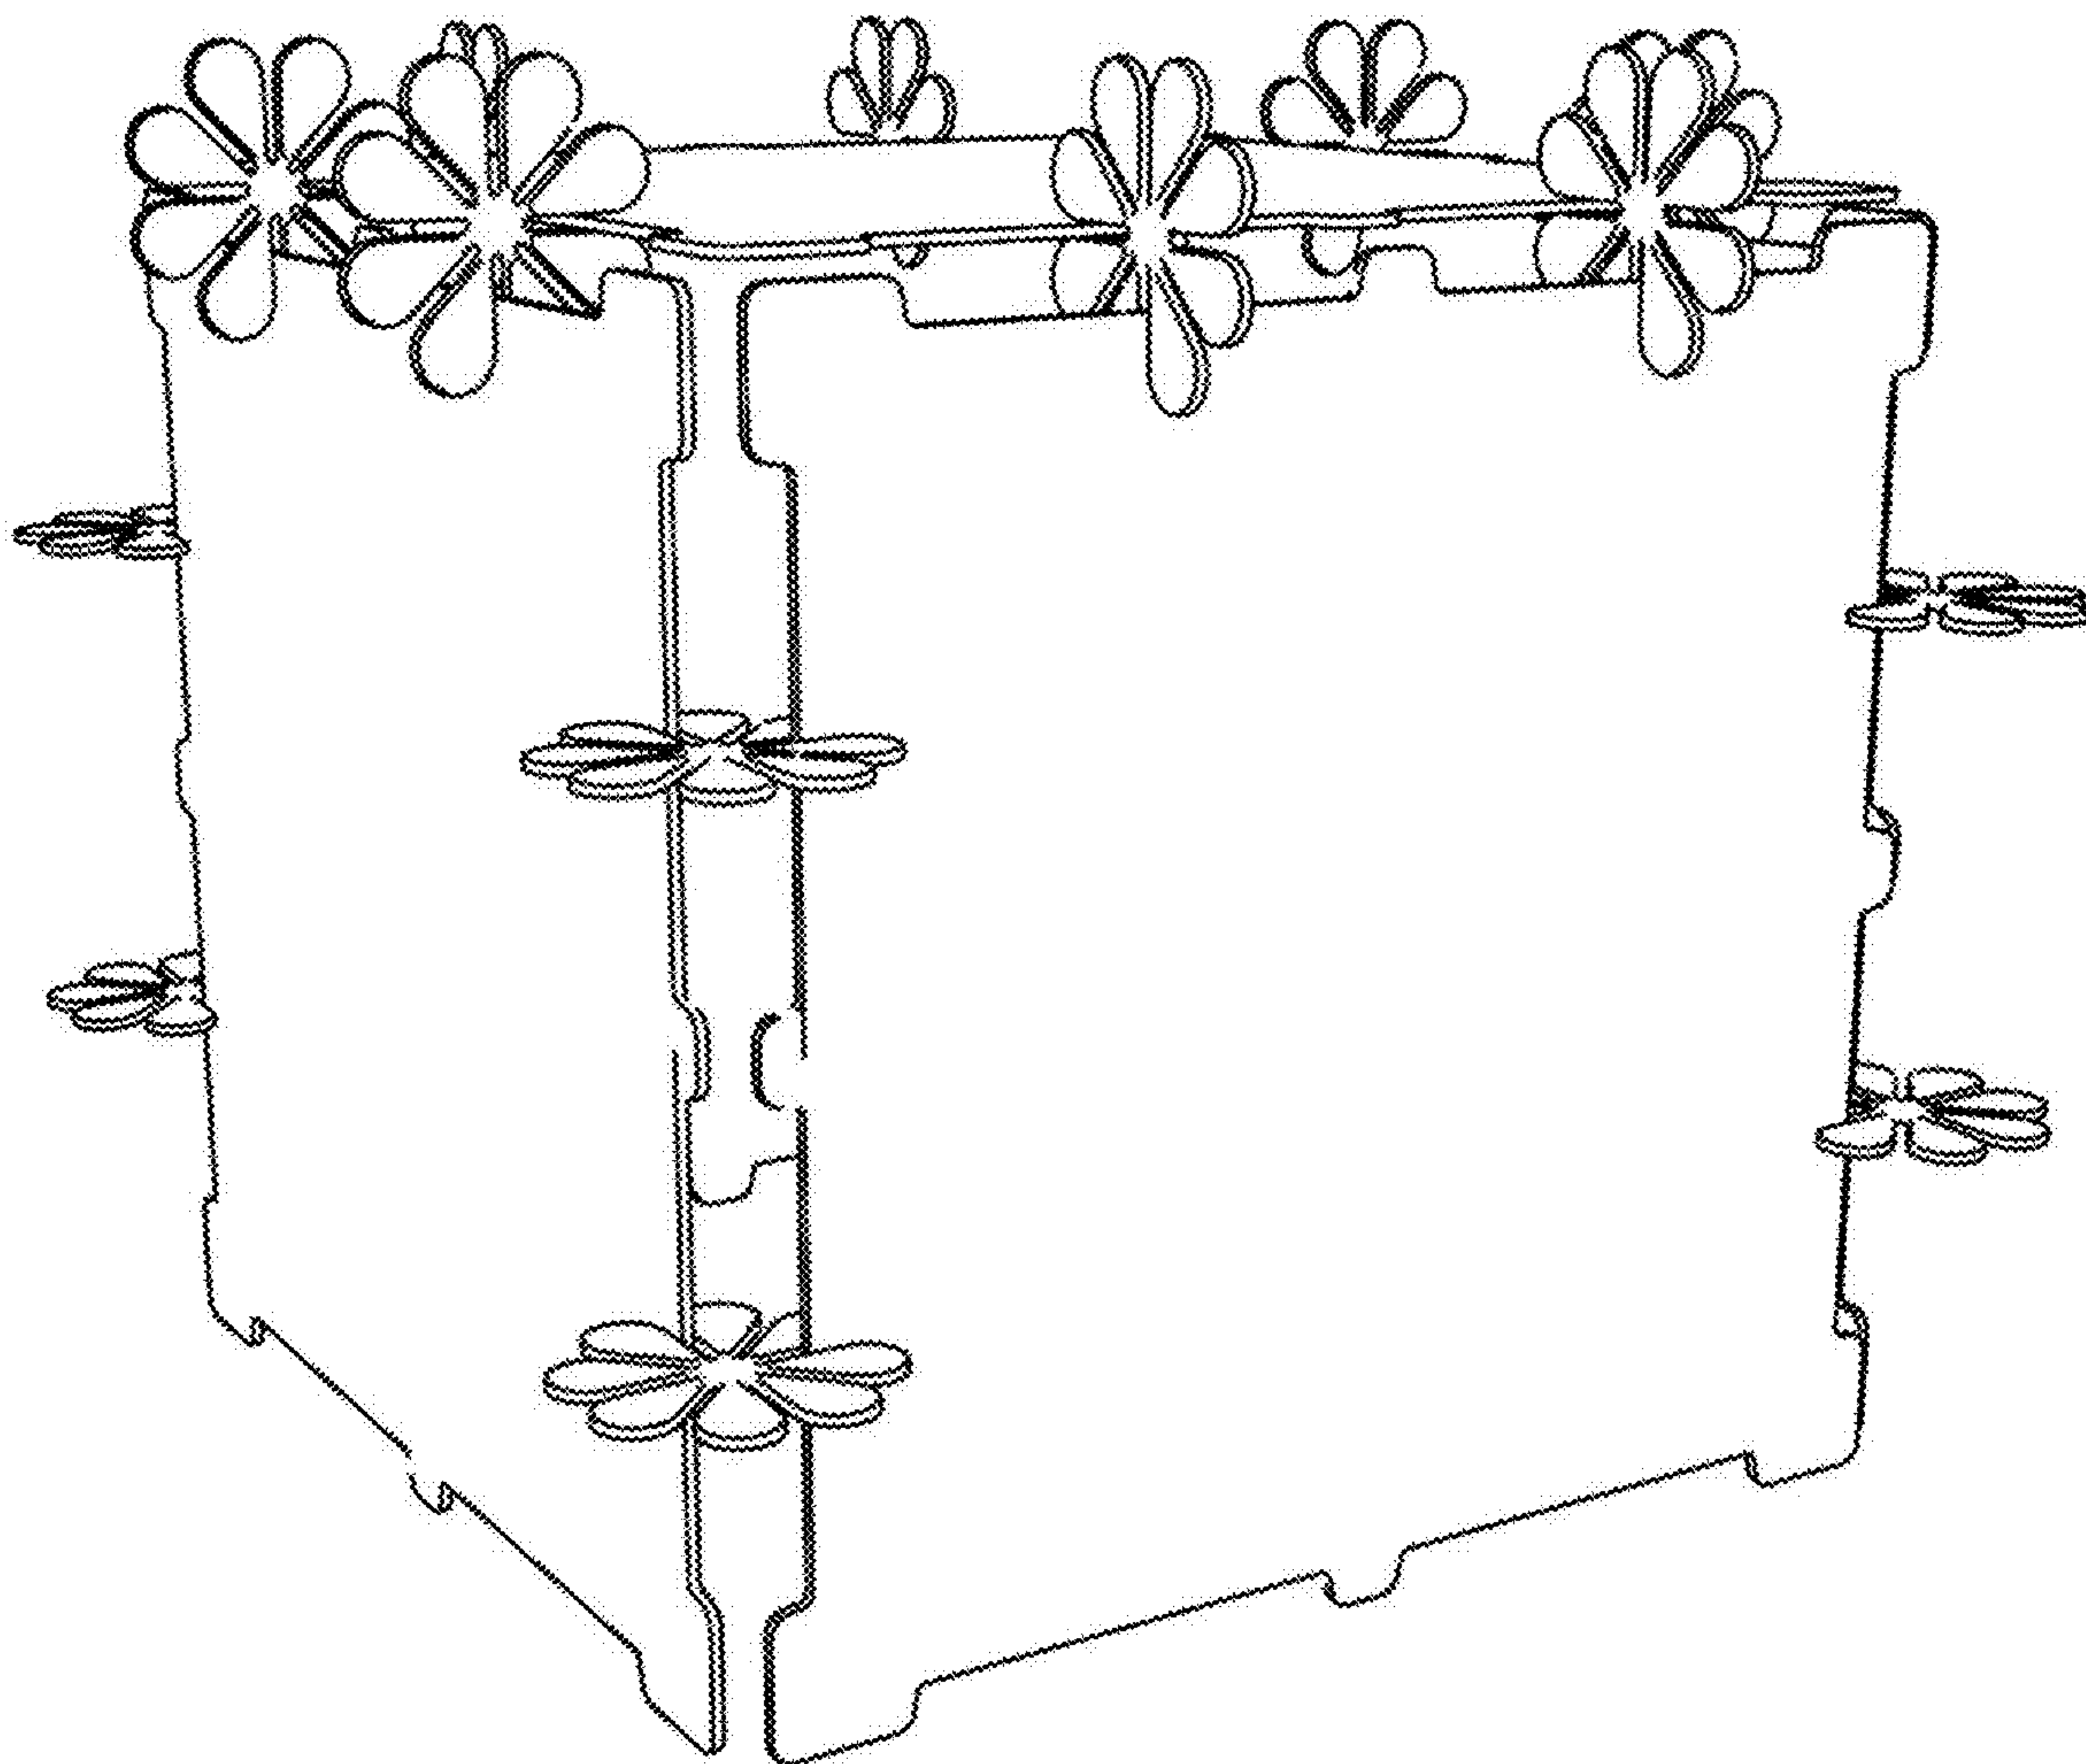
View depicting 3-dimensional assembly using the "Turn-Key" design
